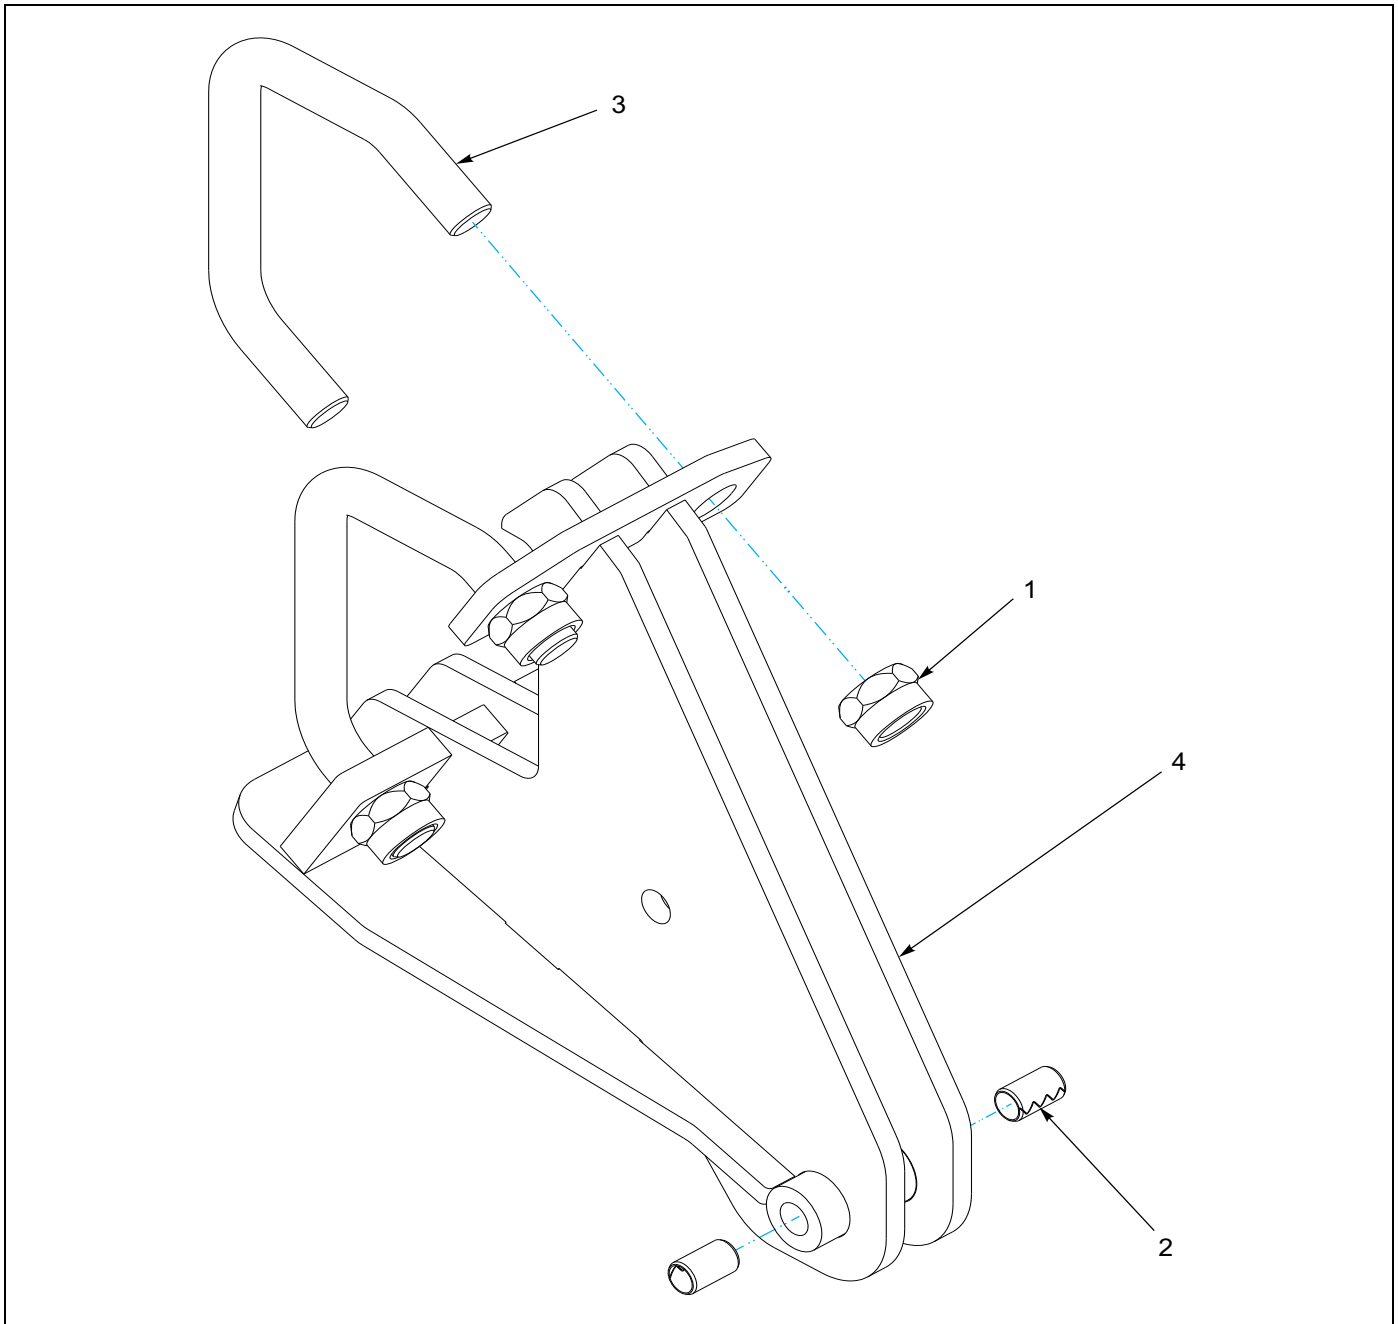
Rigid Shear Bolt Clamp Assembly
